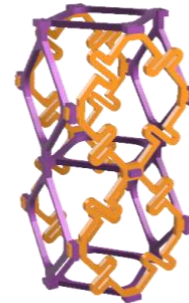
CAD model of the assembled tower. The component parts join to form a “cuboct” geometry, which is a structurally rigid geometry [14]. The flexural components are colored orange while the square parts are colored purple.
